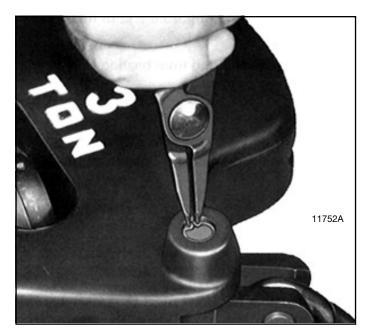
Removing Retaining Ring from Bore of Connecting Link Pin - 3 Ton Lower Block Assembly
